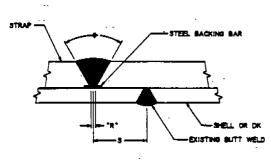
STRIPS OF DOUBLERS JOINED WITH PARTIAL GROOVE WELDING
